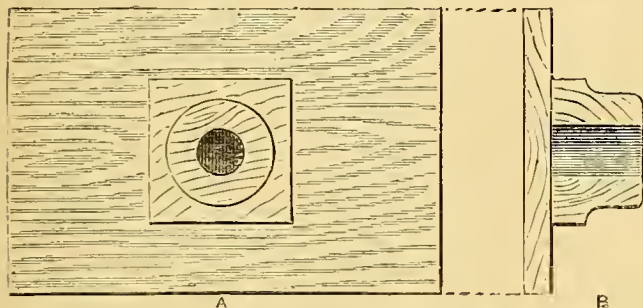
FACE PLATE TO BE FITTED ON END OF SLIDING CYLINDER. A, ELEVATION; B, SECTIONAL SKETCH.
